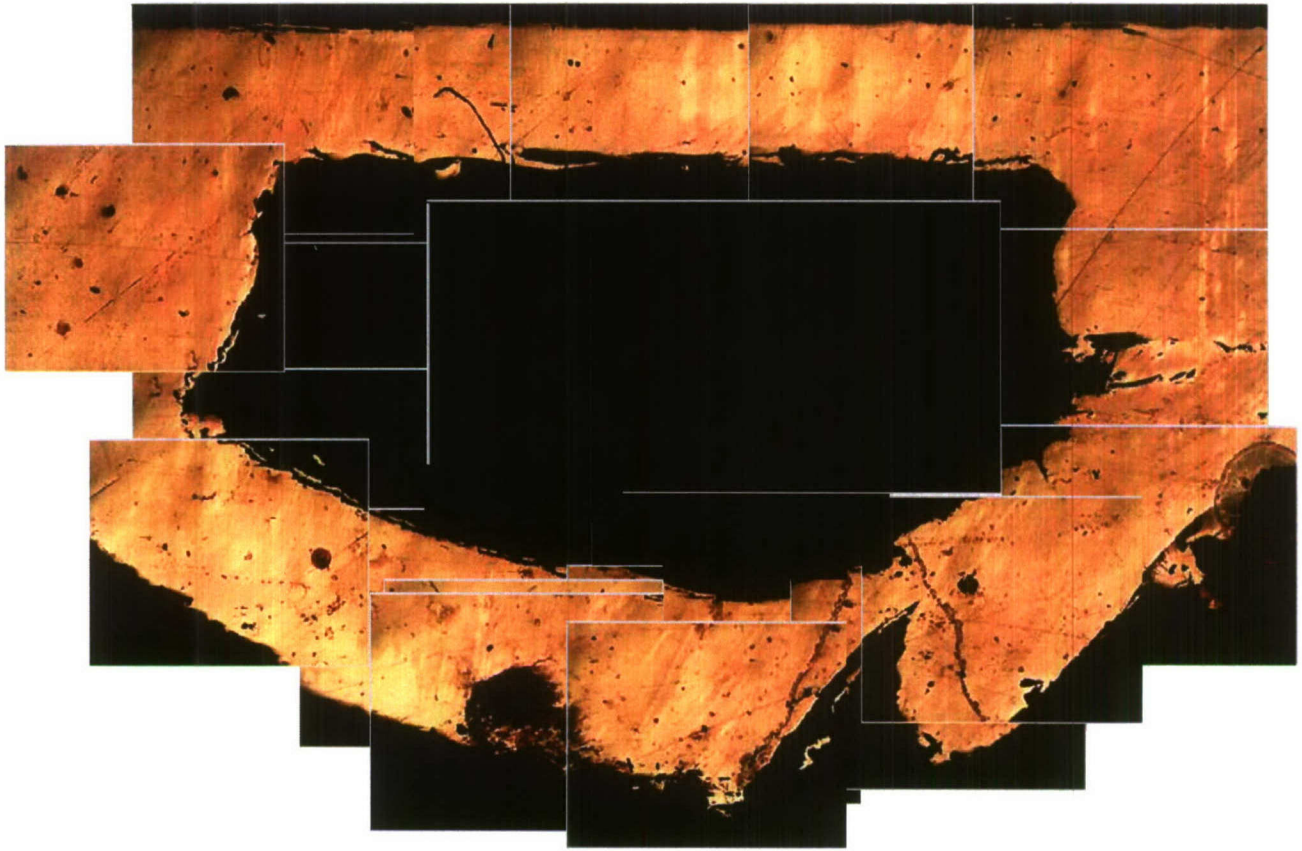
Cross-section of Figure 14 weld. Although weld top surface closed, insufficiently hard underlay material produces large open space “worm hole”. Scale: ~20X
